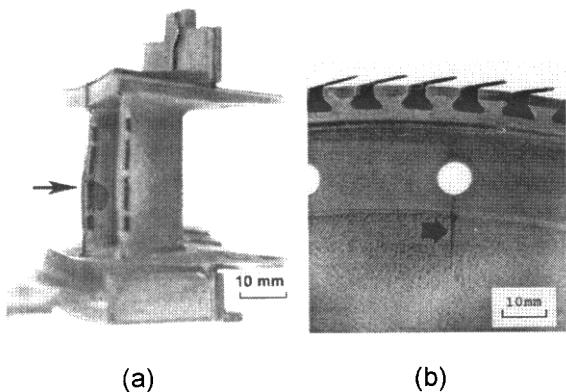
(a) Airfoil bowing, loss of coating and cracking of a CF T56-A15 first stage nozzle guide vane; (b) Crack initiating from bolt hole in CF j85 CAN40/15 compressor disc [15, 16].
